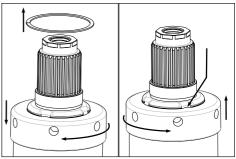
Remove Spiral Retaining Ring and Torque Lock Collar
